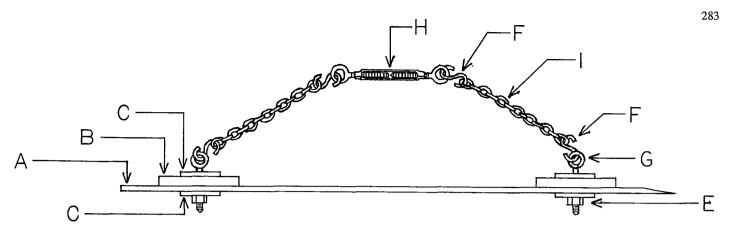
Section view illustration of a clamped jacket with the assembled components and hardware of the RONDAN jacket support clamp in place. Item D is not shown.
